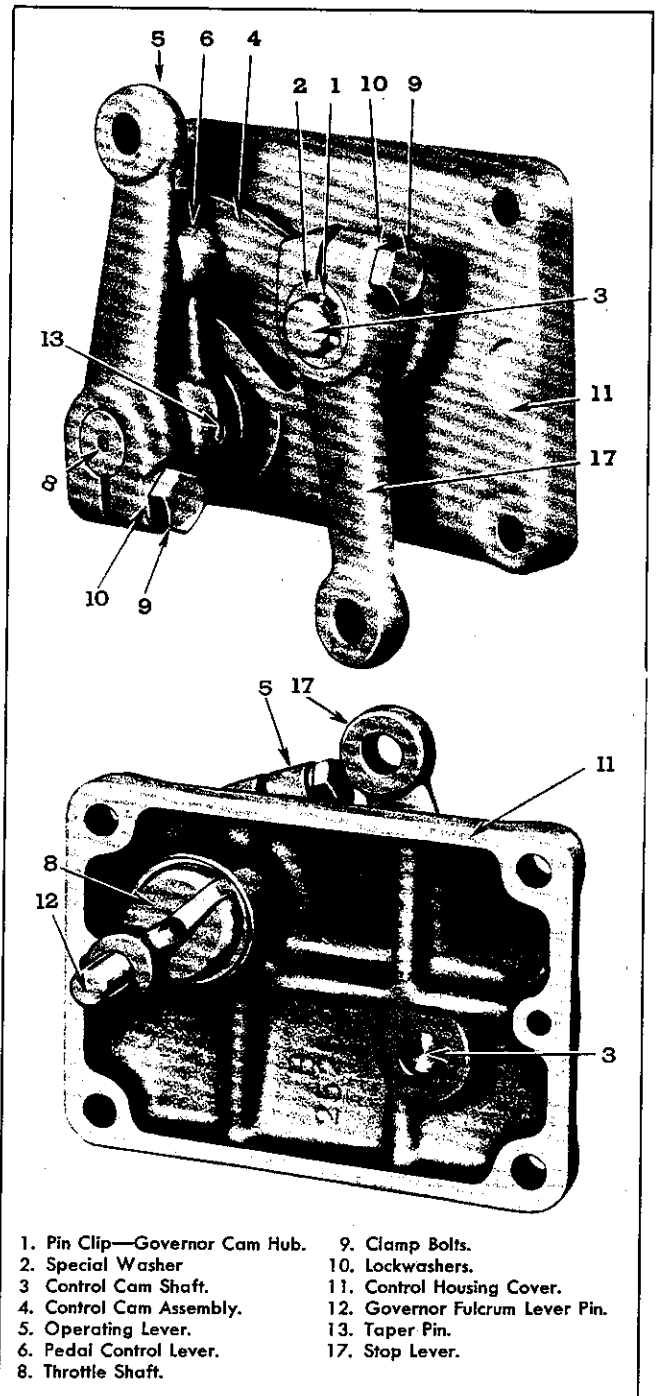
Top and Bottom Views of Governor Control Housing Cover Assembly.
